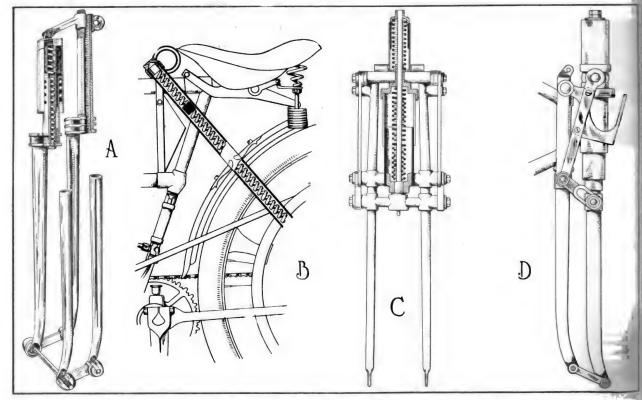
Spring Fork Designs Fitted to Well Known Mounts: A, Spring and Pneumatic Type Utilized on Pierce, B, Spring Frame of Merkel; C, Sectional View of F. N.; D, Method of Attachment.
